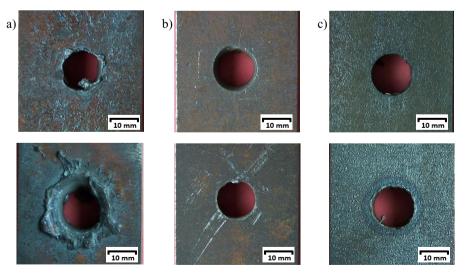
Appearance of thermally cut holes: (a) Oxy-fuel; (b) Plasma; (c) Laser.
